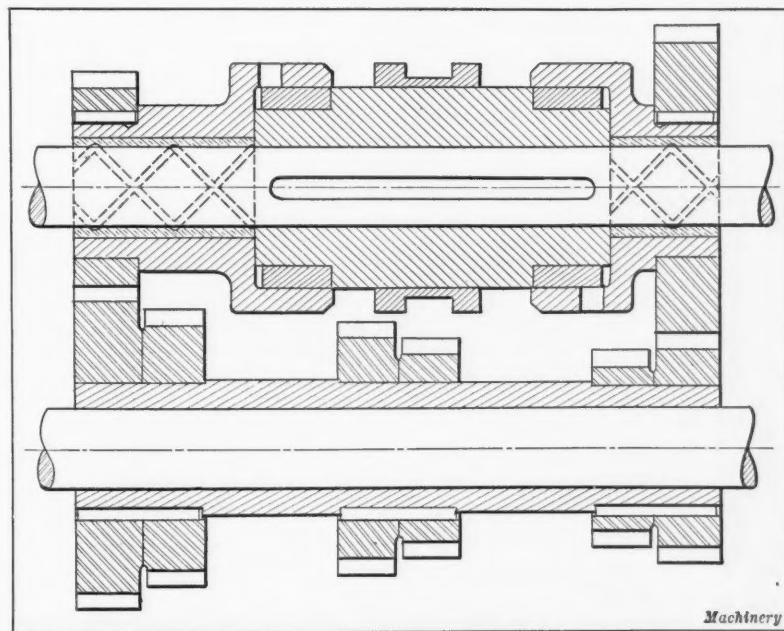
Double Clutch used for obtaining Speed Changes in a Horizontal Boring, Milling, and Drilling Machine
